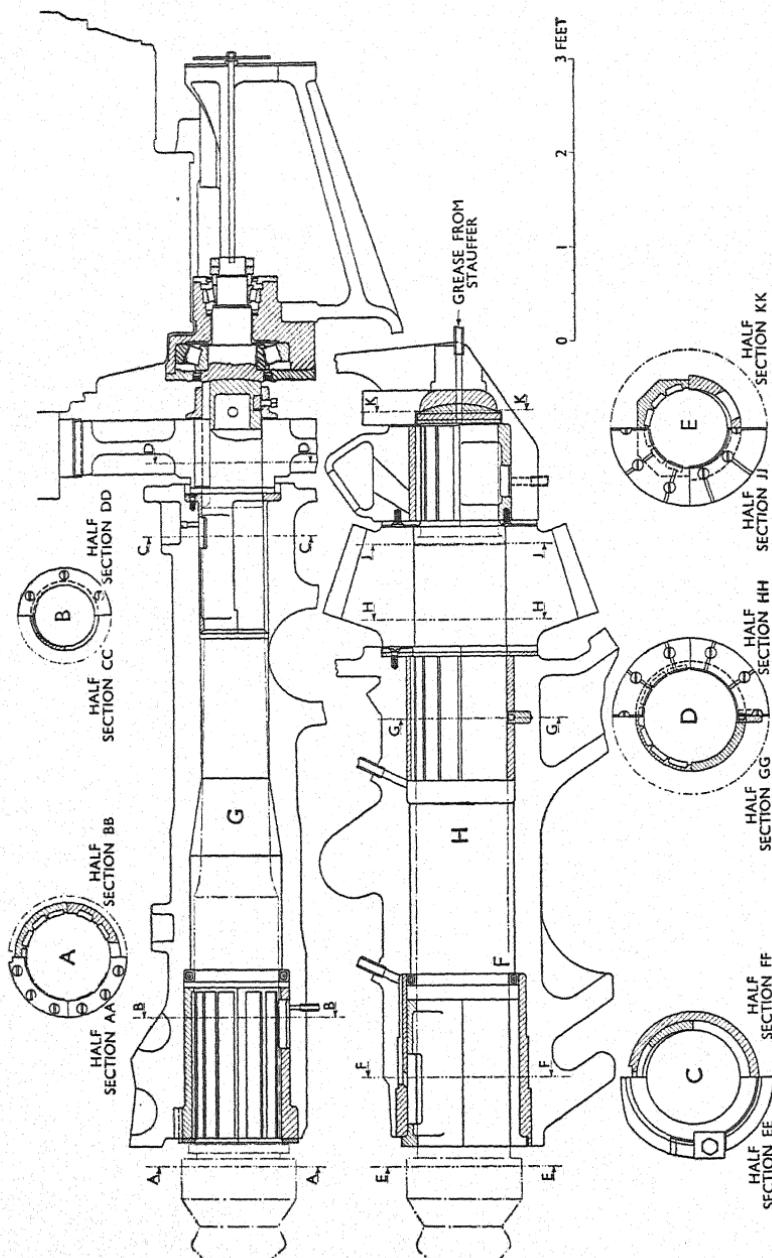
Bottom Edging Shaft Bearing of a Wheel Rolling Mill
